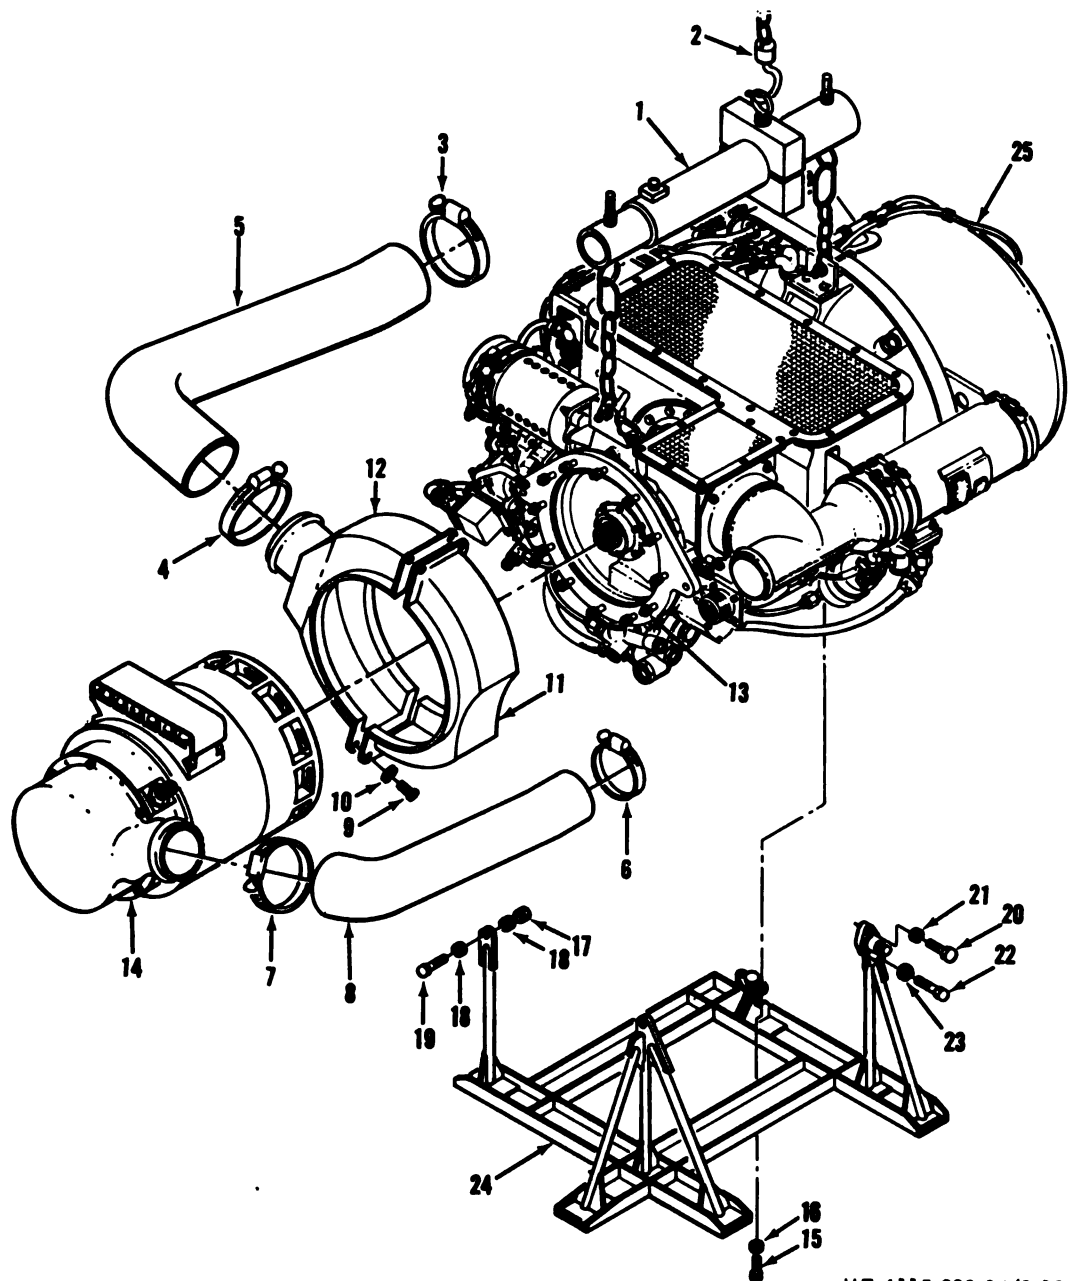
Gas turbine engine removal and installation. (Sheet 3 of 4).
